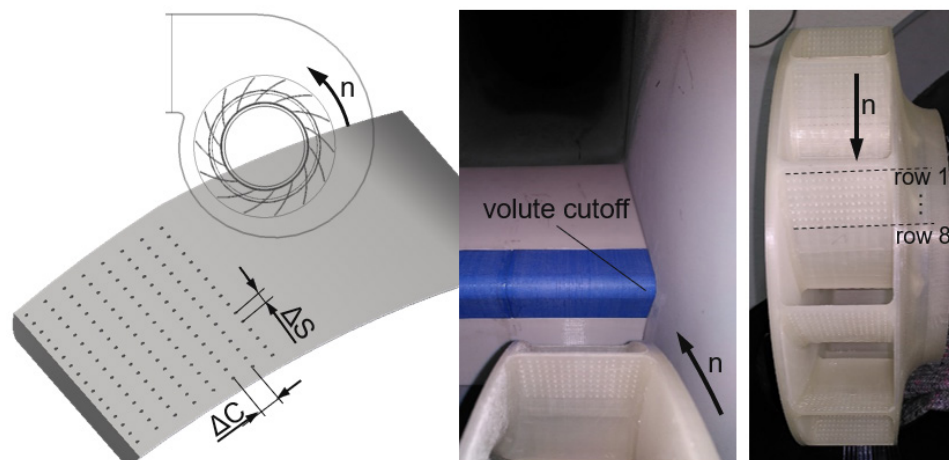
Impeller treatment: Single perforated impeller blade (left), impeller mounted inside its casing and connected to the exit duct (central), and impeller sideview with direction of rotation (right).
